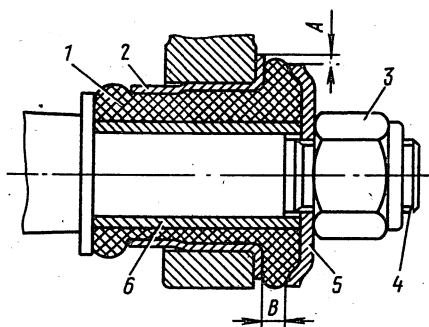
Examining the Front Suspension Wishbone Silent Block:
